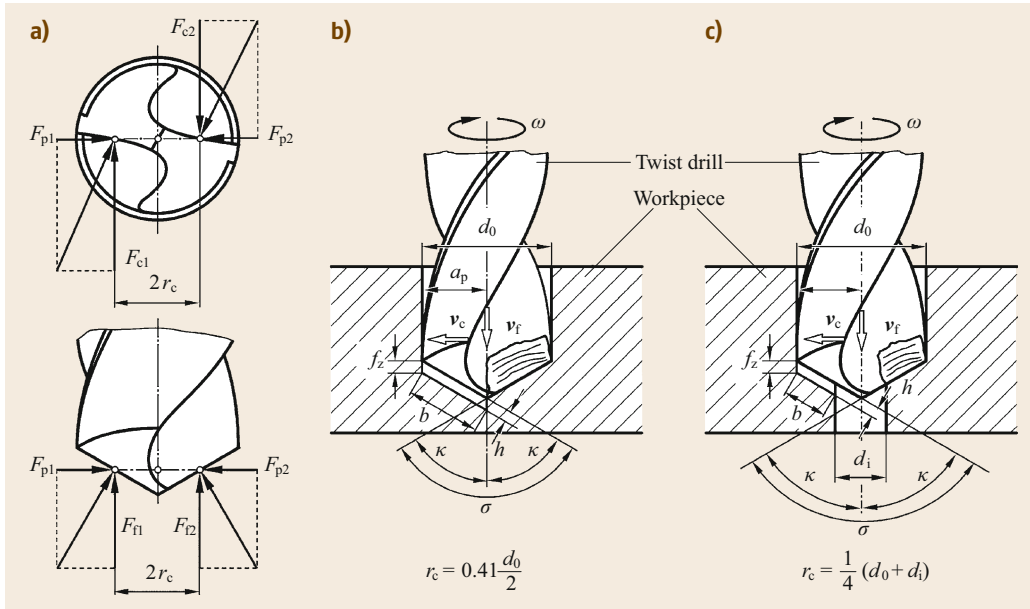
c Cutting geometry and machining forces in drilling. (a) Forces; (b) solid drilling; (c) enlarging
